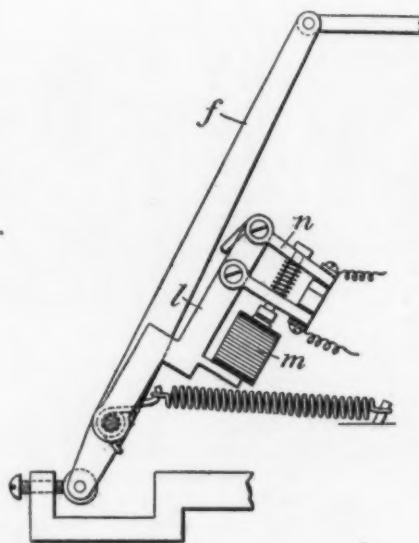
Detail of Circuit Closer Controlling the Clutch.
